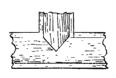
Plan of Umbrella Stand's Top-rail Joint.
